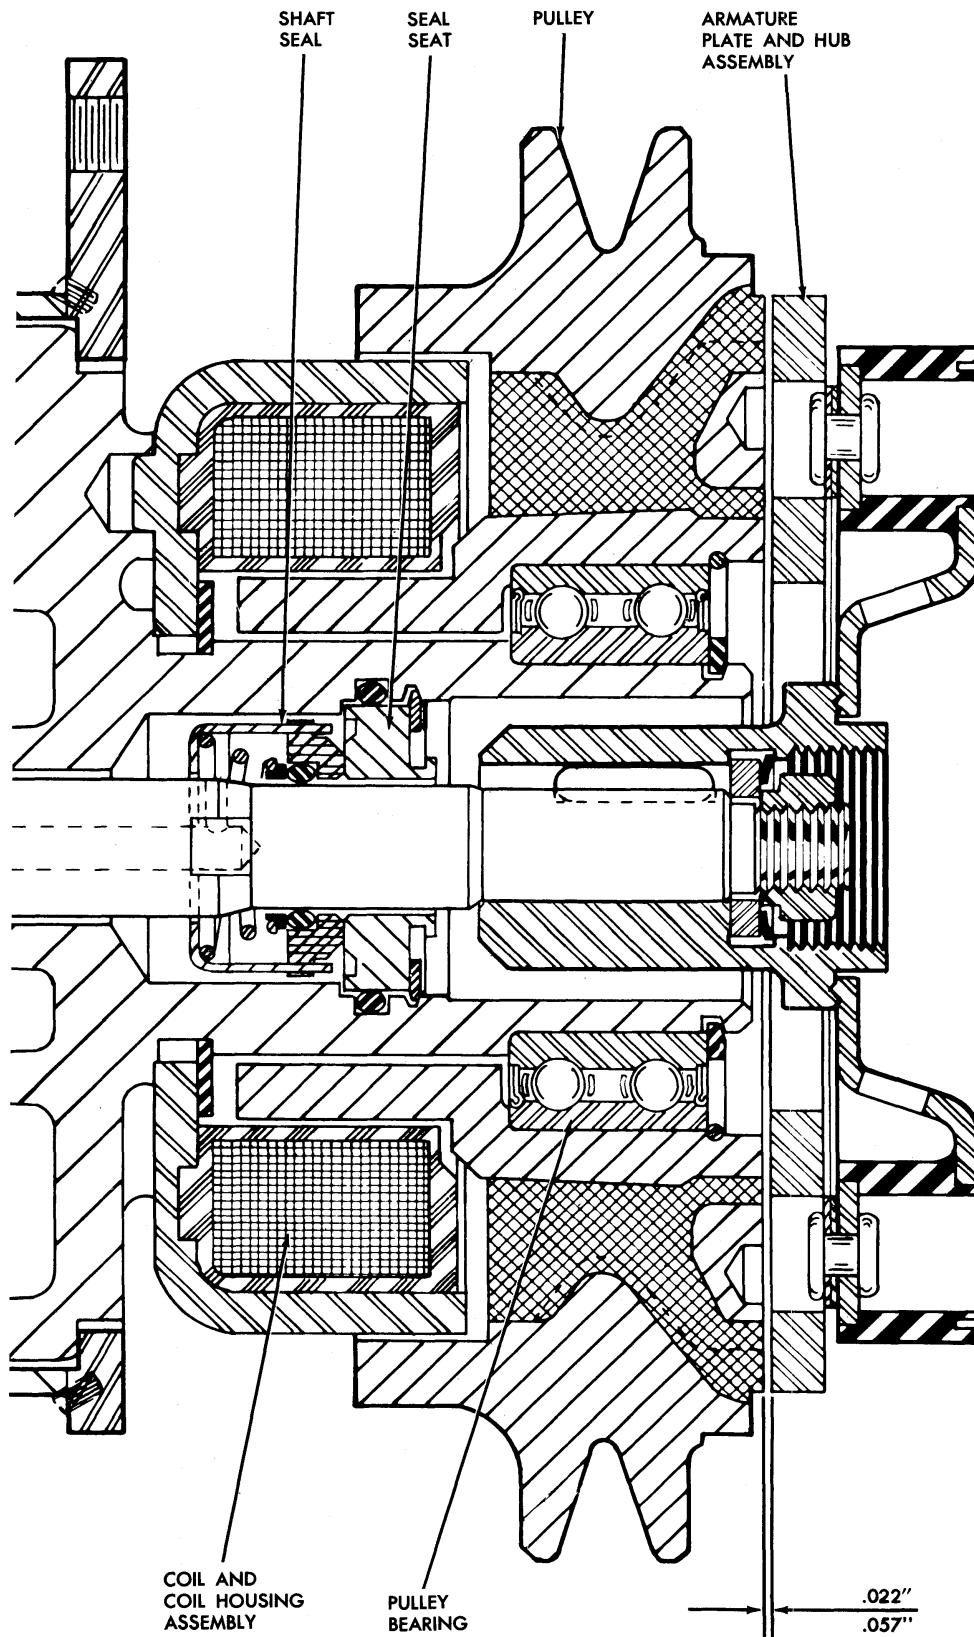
Cross Section - 6 Cylinder Clutch Assembly
